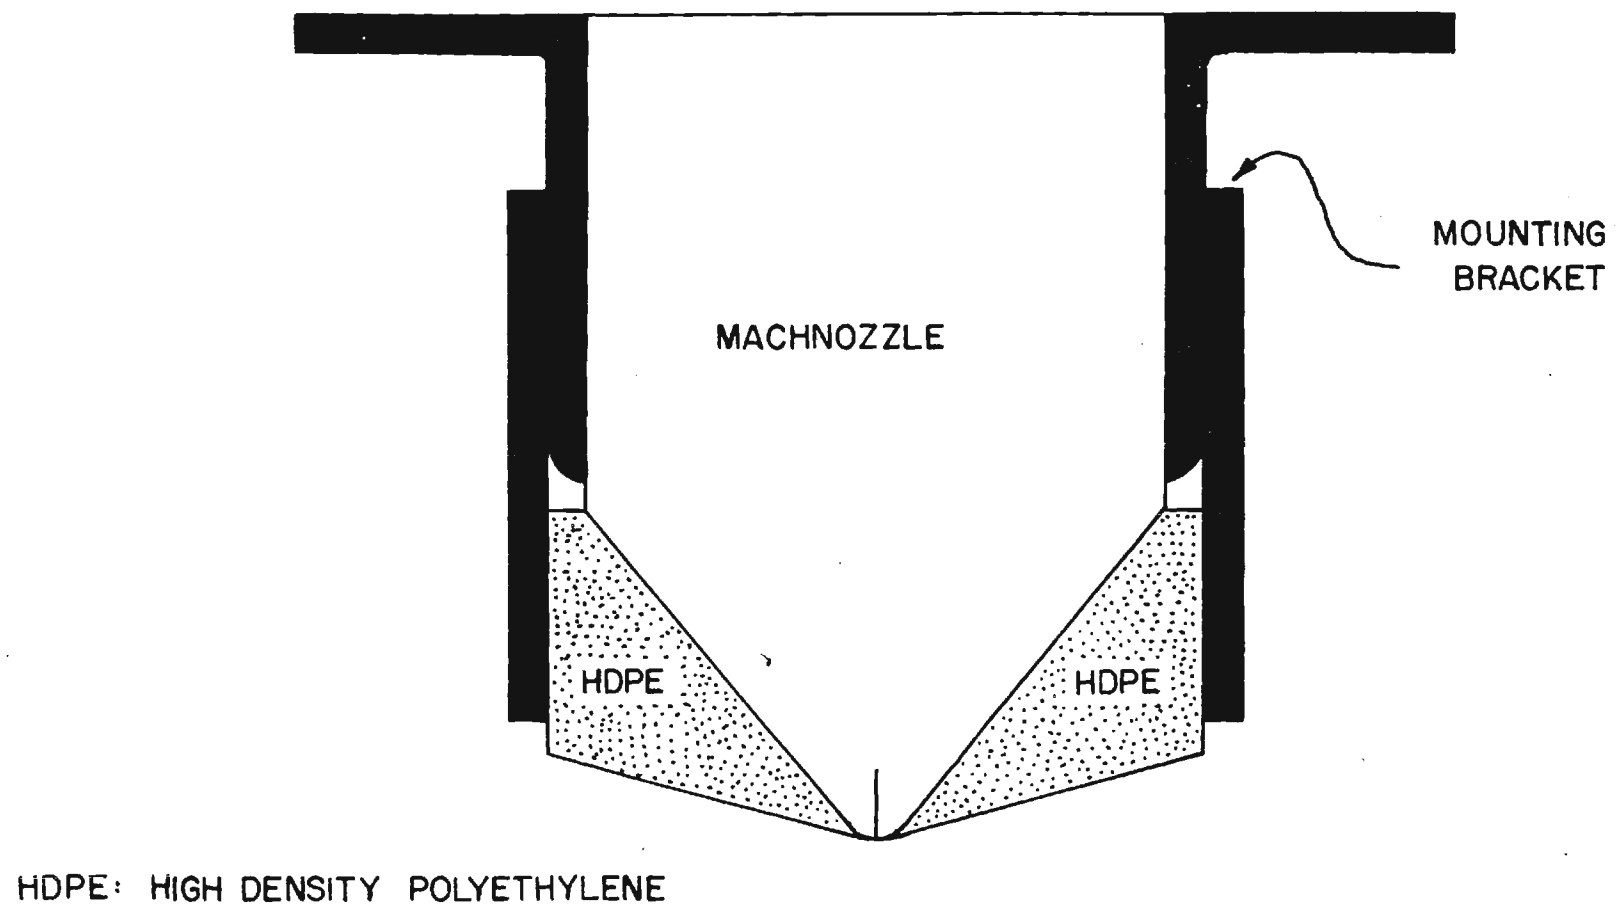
ALTERED FACE ANGLE OF MACHNOZZLE
